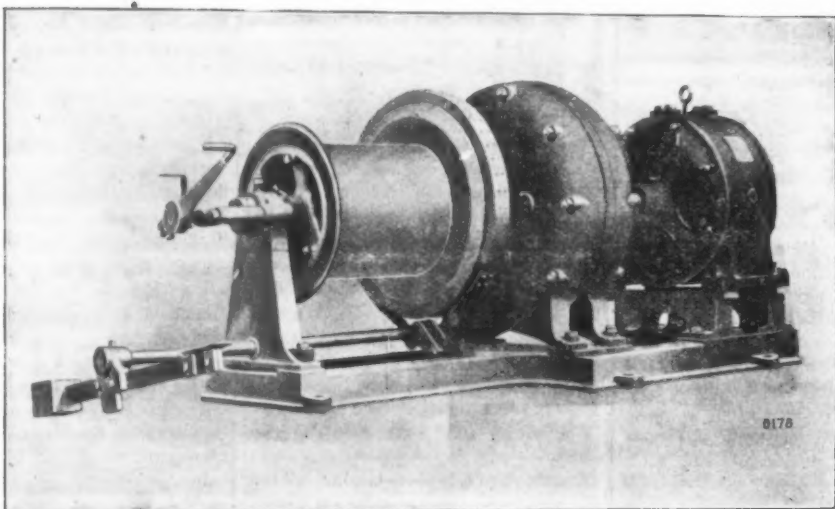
ELECTRIC COAL-HOISTING ENGINE.
